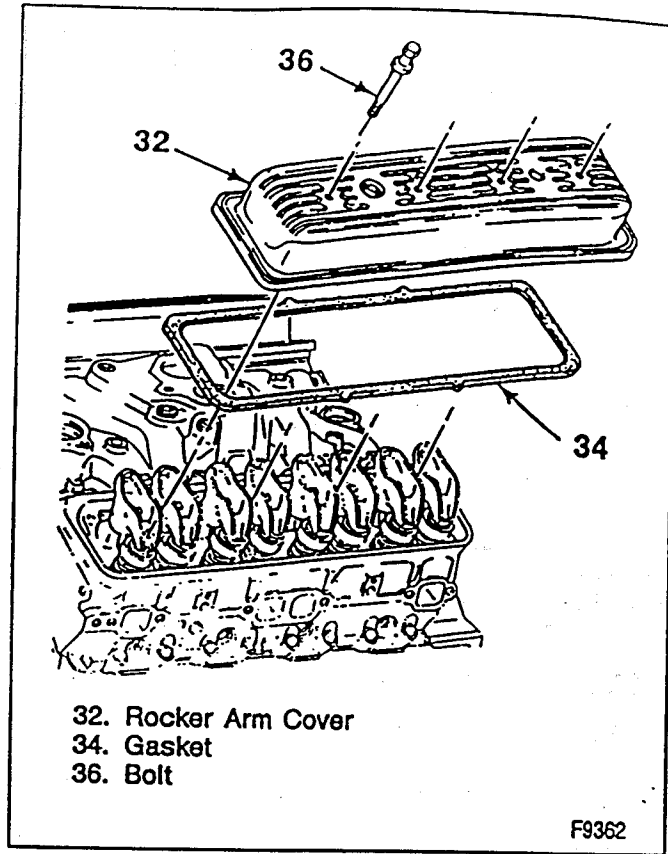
Rocker Arm Cover Installation (5.0L and 5.7L Engines)
